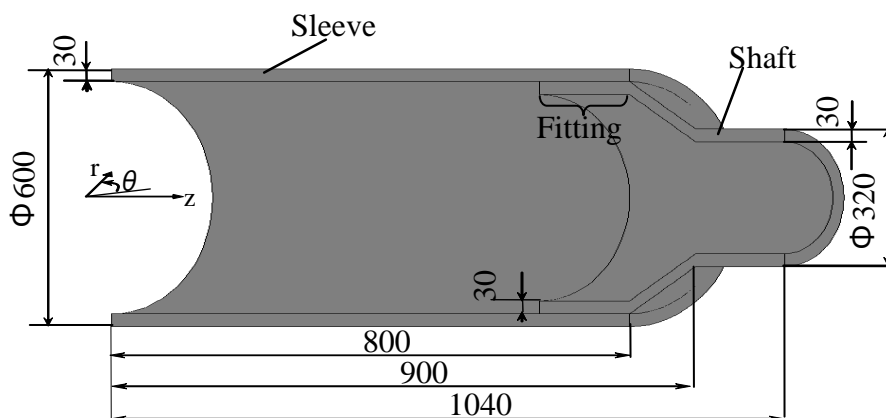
Dimensions of 1/4 cylindrical model (mm)
